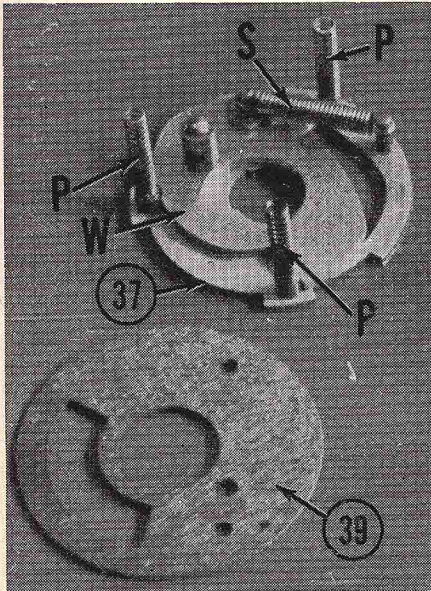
Speed governor and rotary inlet valve used on some models. Refer also to Fig. HL17.
